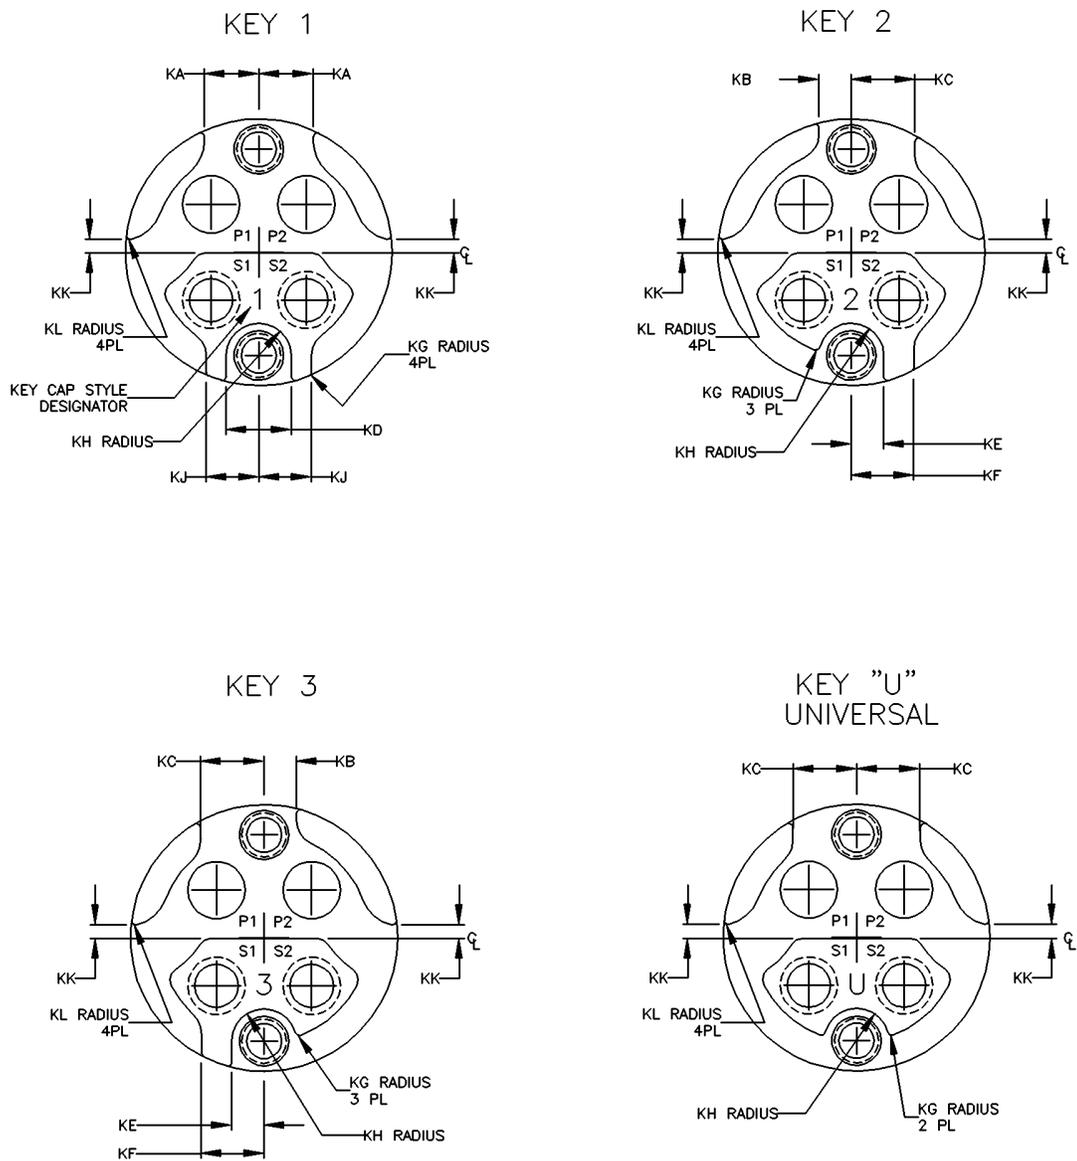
Insert cap interface dimensions (View B-B) - Continued.
